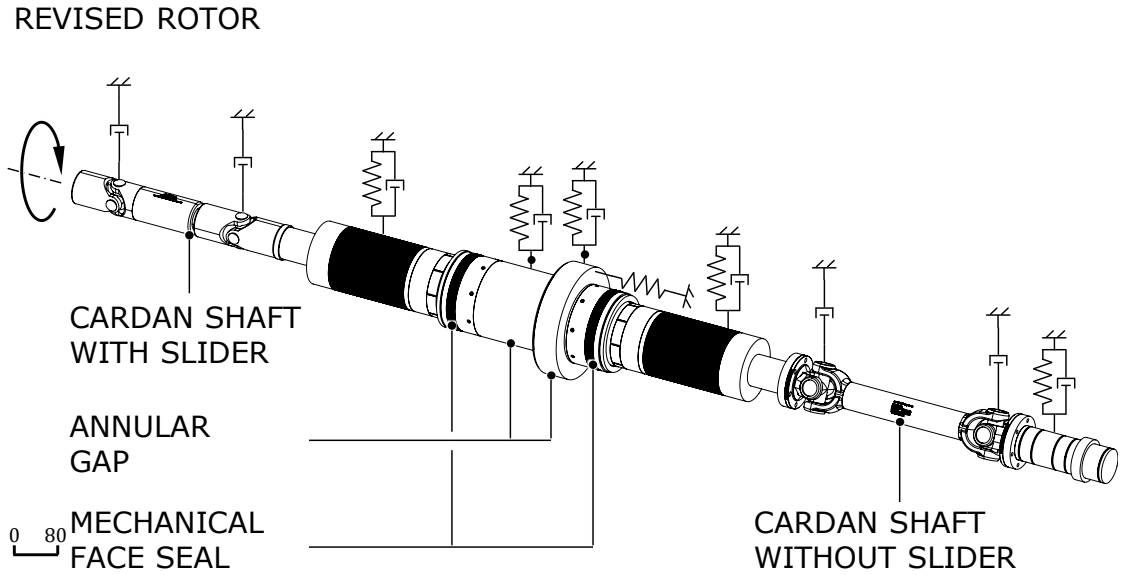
Revised rotor of the annular seal and bearing test rig at the Chair of Fluid Systems. The sketched mechanical elements indicate the position of additional modelled stiffness, damping, and inertia coefficients used in the calculation.
